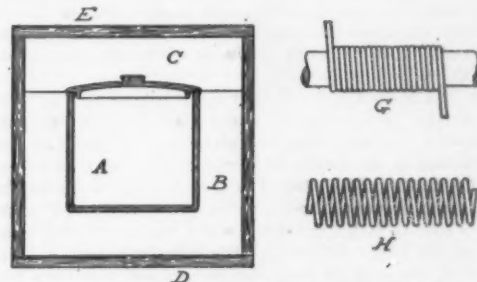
SECTION OF THE ELECTRIC COOKER AND METHOD OF MAKING THE HEATING COIL.
